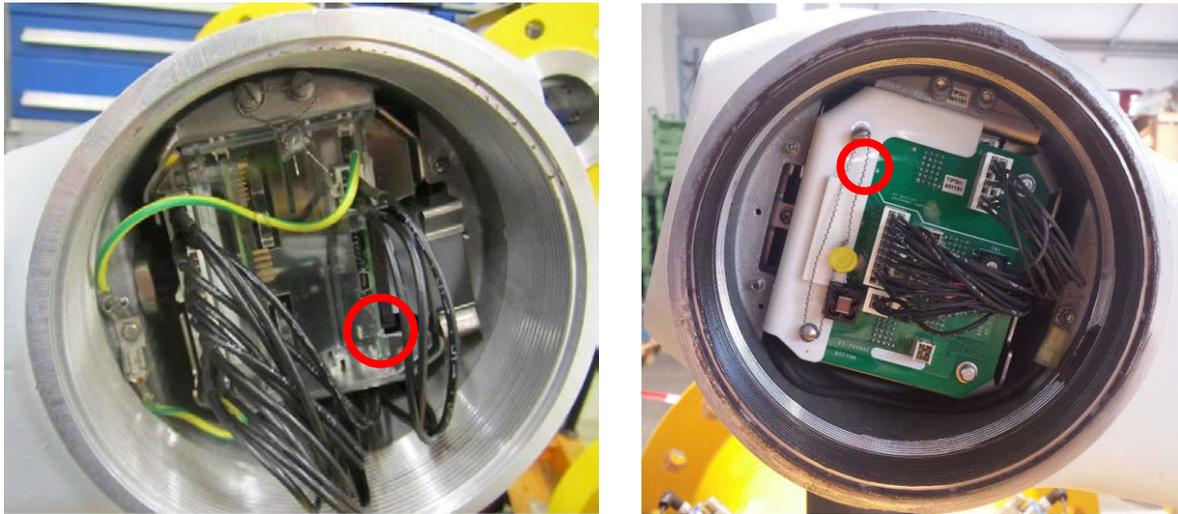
Detail view of electronics sealing bracket (left and right of SPU) with switch locations marked / Vue détaillée du dispositif de scellage des composants électroniques (gauche et droite du processeur de signaux) avec indication de l'emplacement du commutateur
